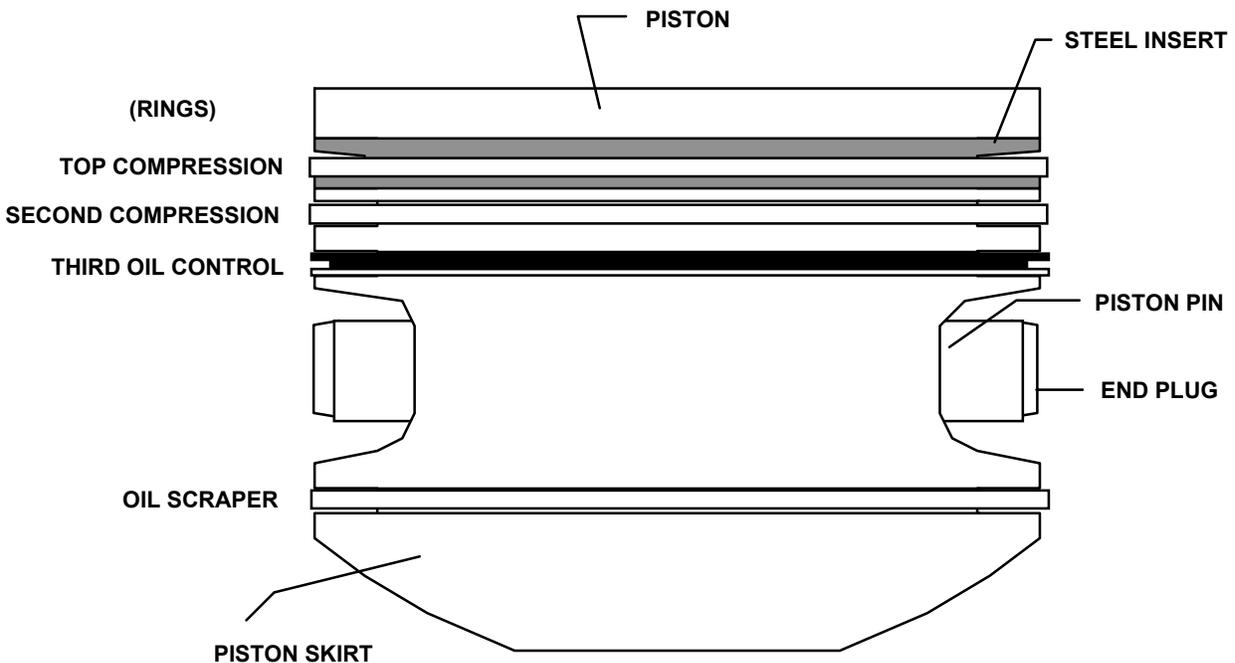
PISTON ASSEMBLY DISCRIPTION
